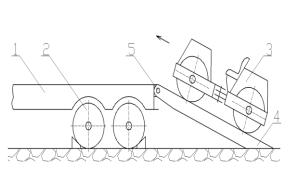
Simple loading ramp for lightweight machines 1-trailer platform; 2-pneumatics; 3-machine; 4-loading ramp; 5-hinges.
